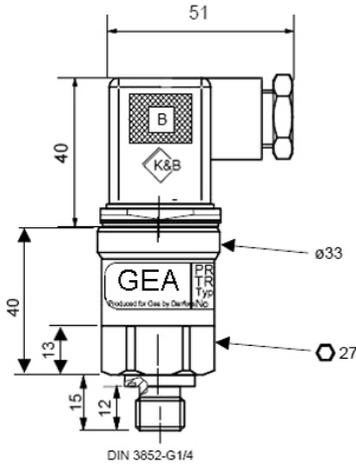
Pressure transducer AKS 3000... GEA Grasso, Dimensions
